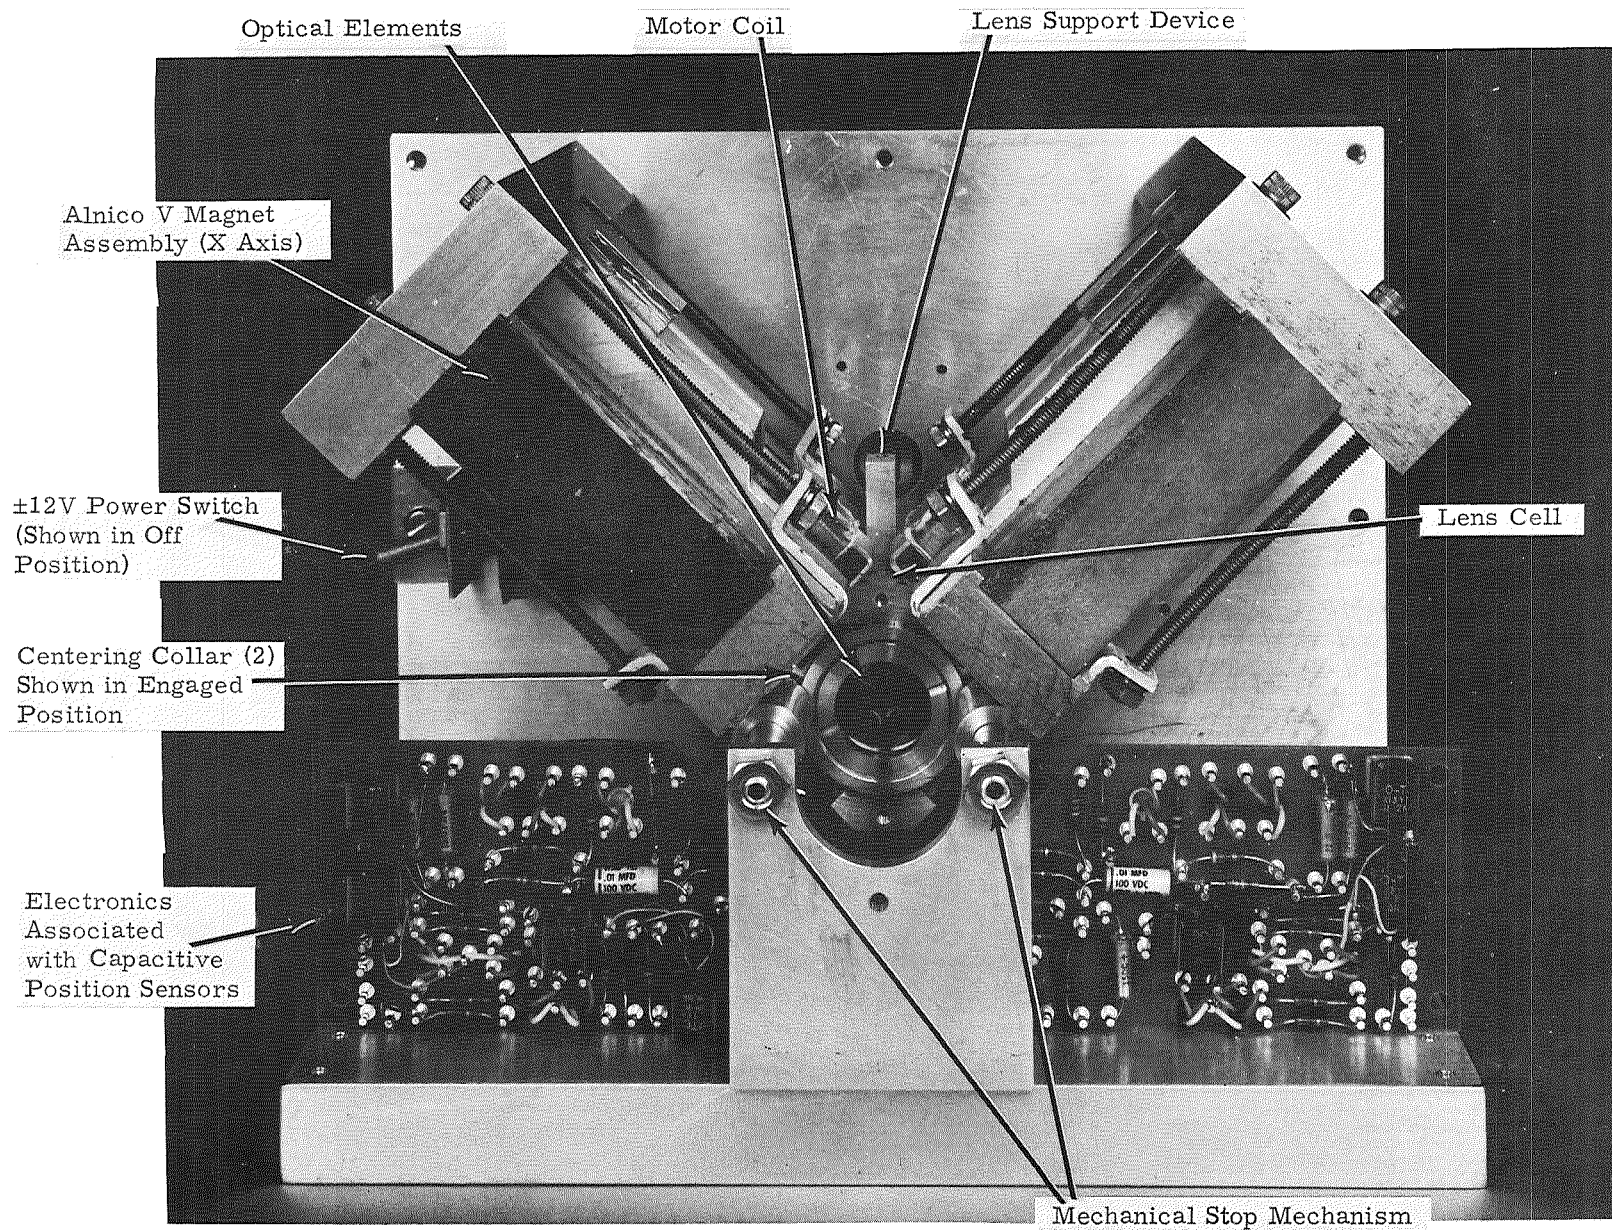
• Transfer Lens Mechanical Subassembly, Front View
